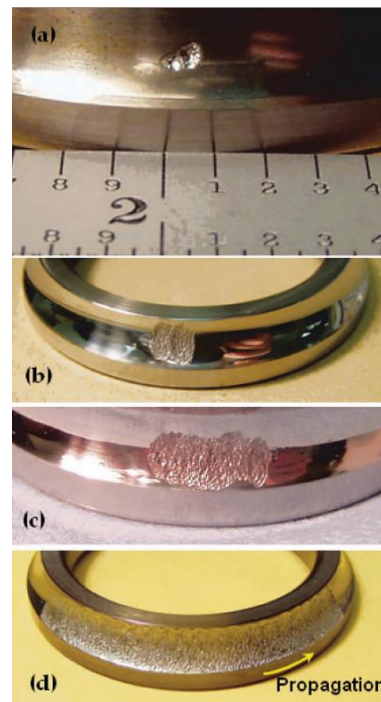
Typical spall propagation stage. (a) Initial spall. (b) Local spall widening. (c) Spall propagation. (d) accelerated spall propagation (Arakere et al, 2010)
